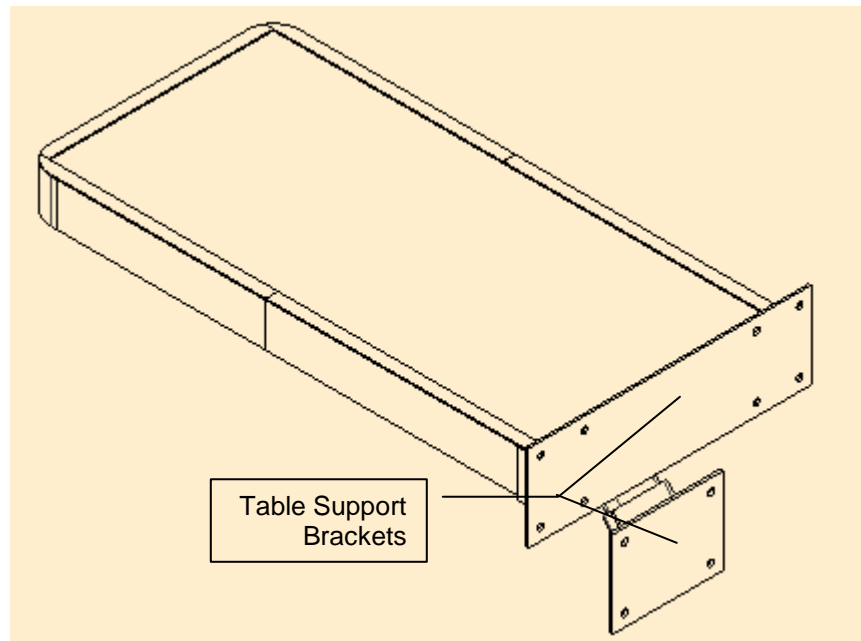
An Isometric View of the Crushable Table with Its Mounting Support Brackets
